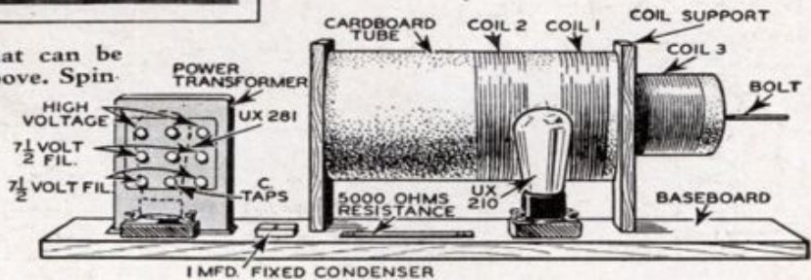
Here is a side view of the vacuum tube Tesla coil, showing the layout of parts on a baseboard. For higher power, an additional tube may be used, wired up in parallel with the 210 tube.
